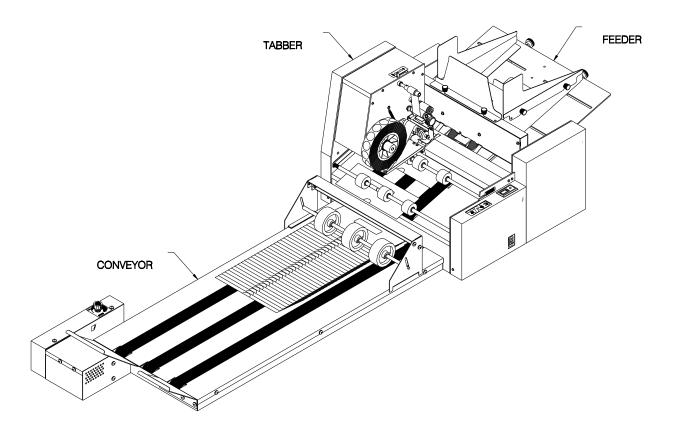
The FD 260-10 Feeder in-line with the FD 260 tabber and the optional FD 260-20 conveyor
